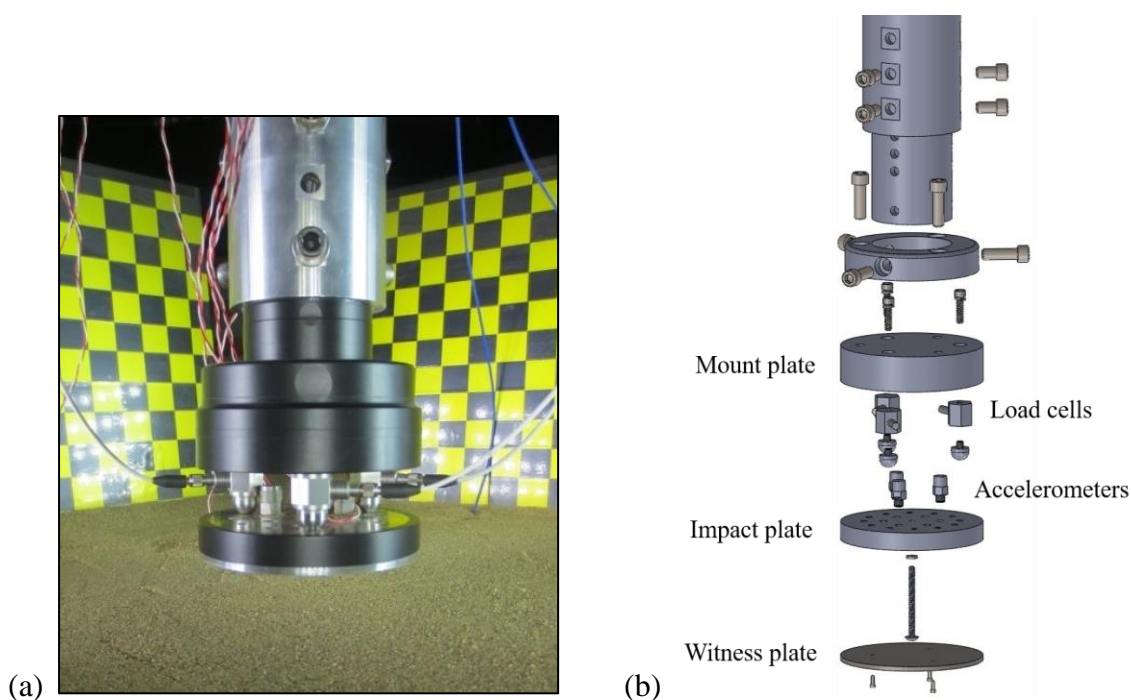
(a) The BIRG positioned directly above a buried charge pre-detonation; (b) 3-D exploded view drawing of the BIRG (*to-scale*).
